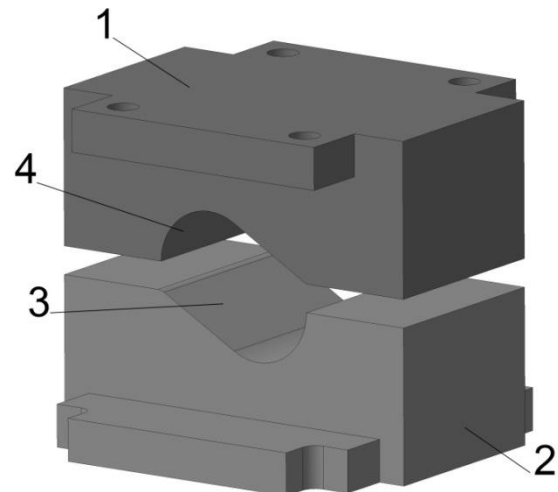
Tool for broaching: 1 – upper striker; 2 - lower striker; 3 - flat working surface of the striker; 4 - working surface of the striker, made in the form of a circle segment
